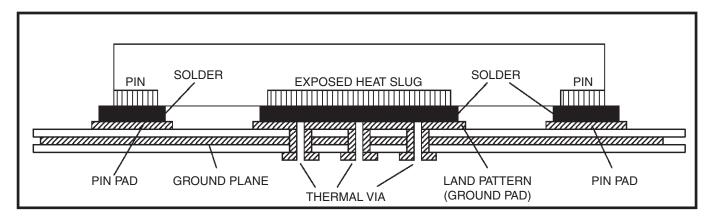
P.C. Assembly for Exposed Pad Thermal Release Path - Side View (drawing not to scale)
